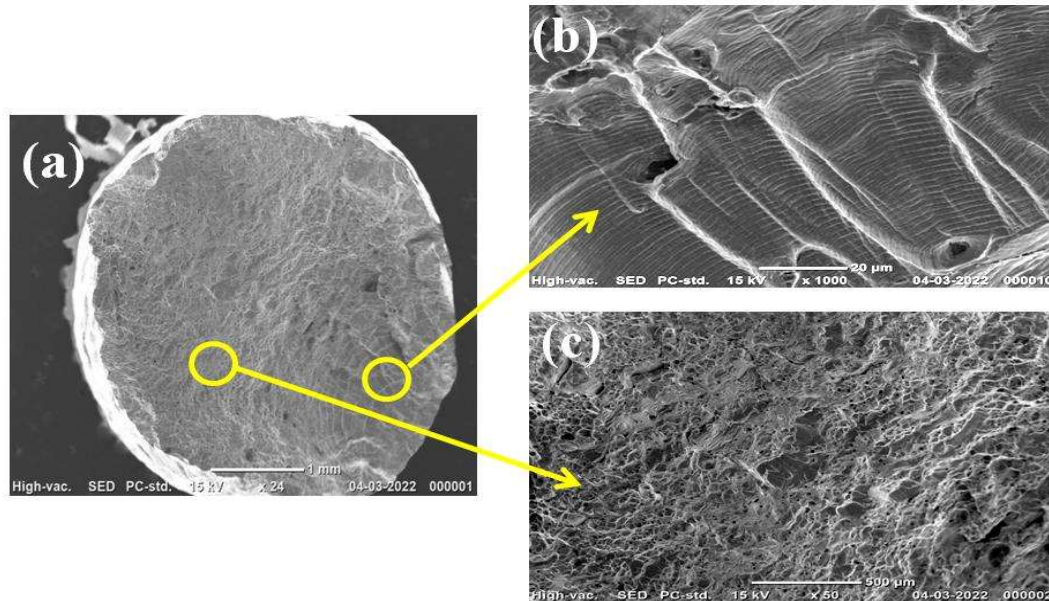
Fracture surface of Inconel 617 alloy ratcheted at $0.42 T_m$ (a) full view of the fracture surface (b) magnified view of the fatigue region showing striations and (c) magnified view of the tensile region showing dimples.
